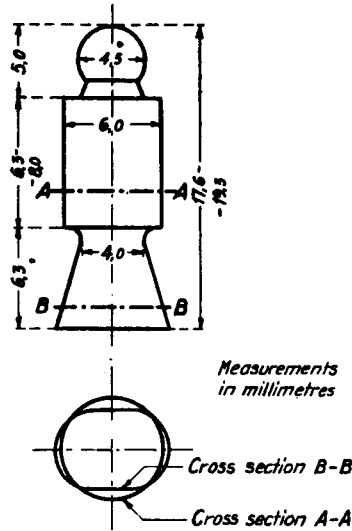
Pin of stainless steel. Measurements in millimeters.
